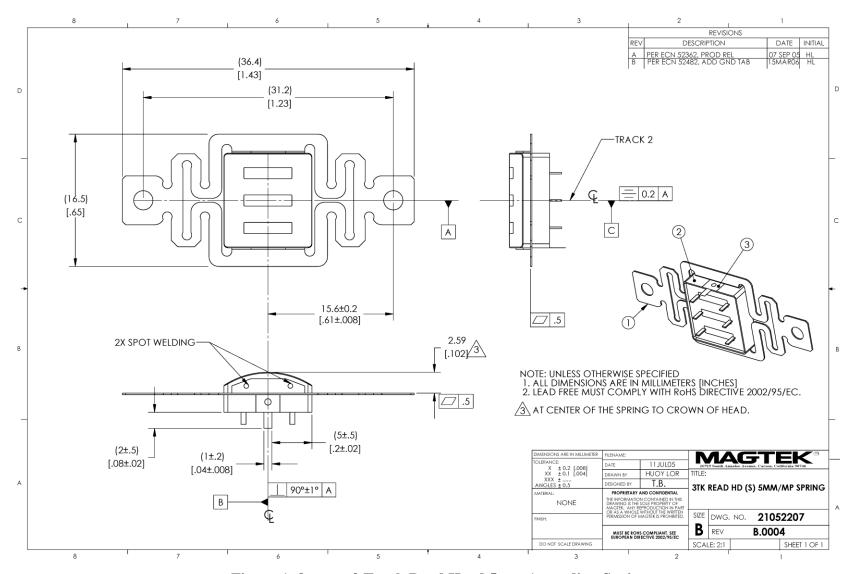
3 Track Read Head 5mm Accordion Spring
